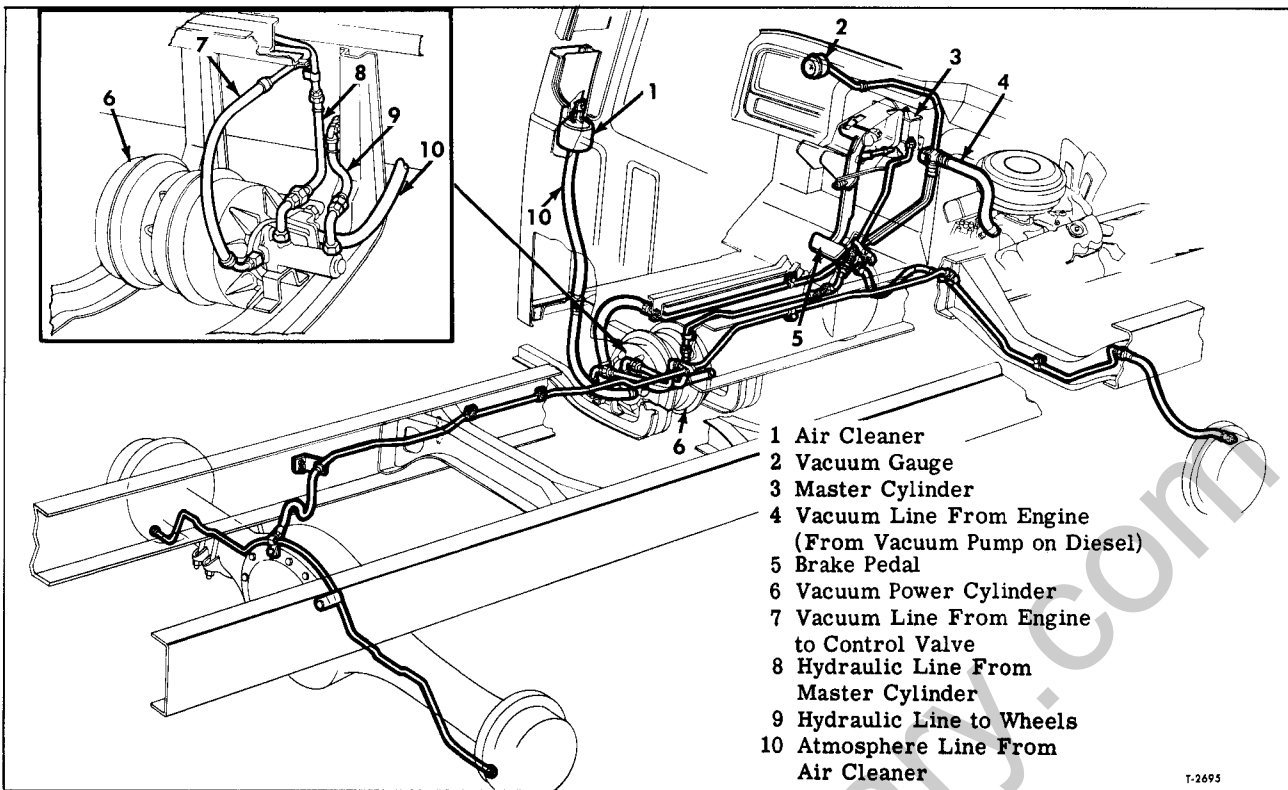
Typical Vacuum and Hydraulic Lines Installed
